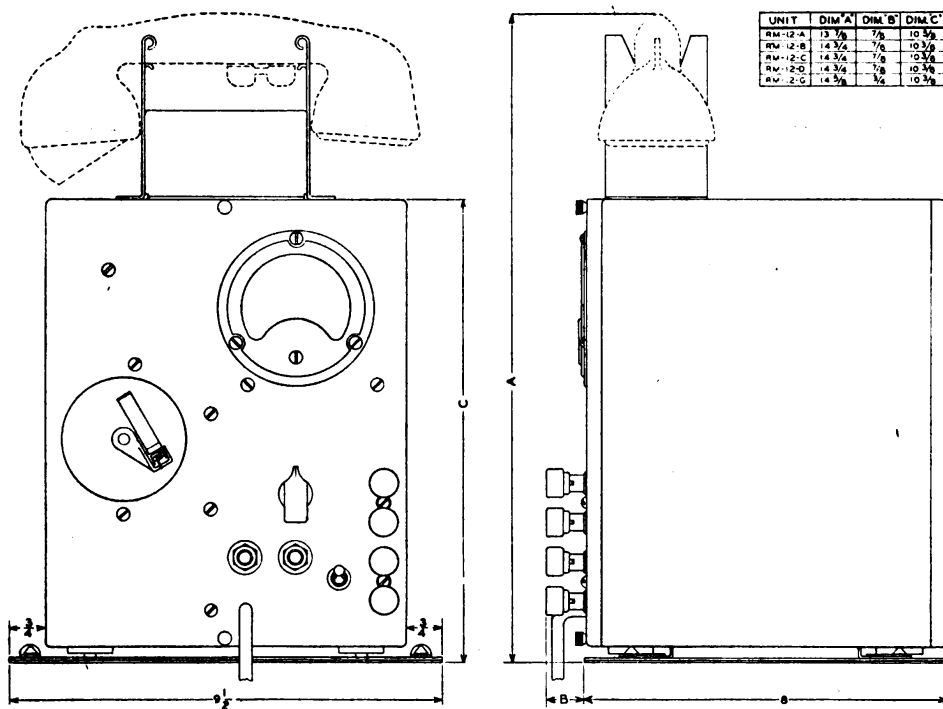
Remote Control Unit RM-12-(\*)—outline dimensions
